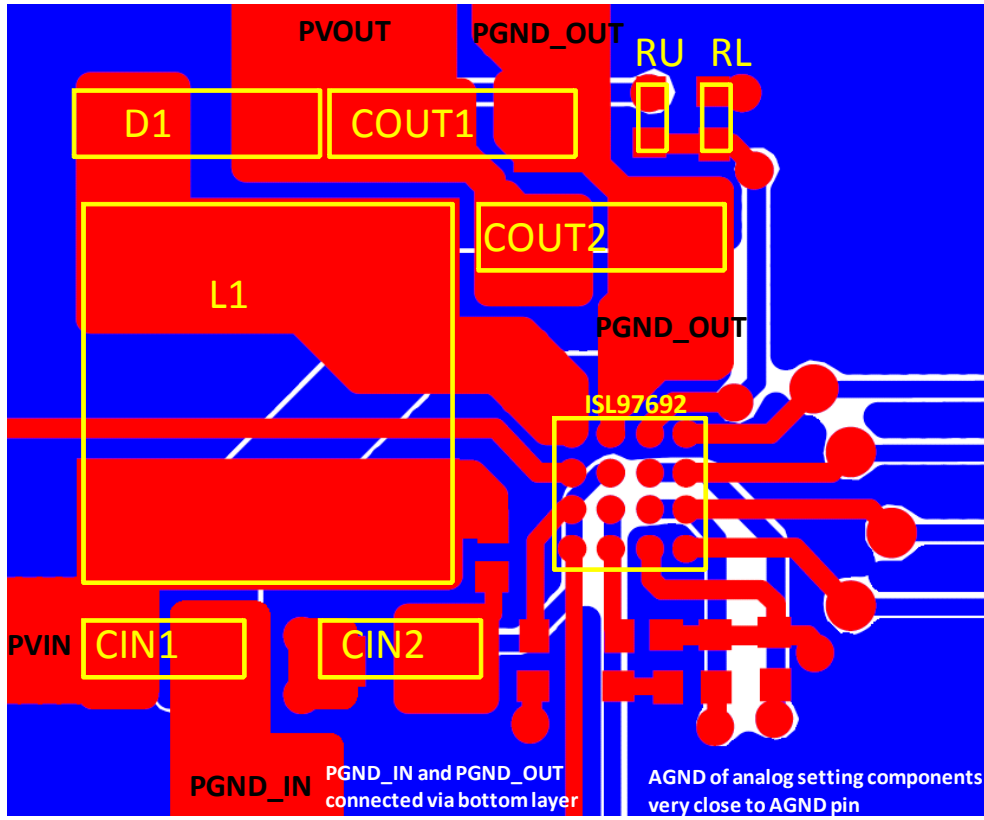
EXAMPLE OF PCB LAYOUT of ISL97692 WLCSP
